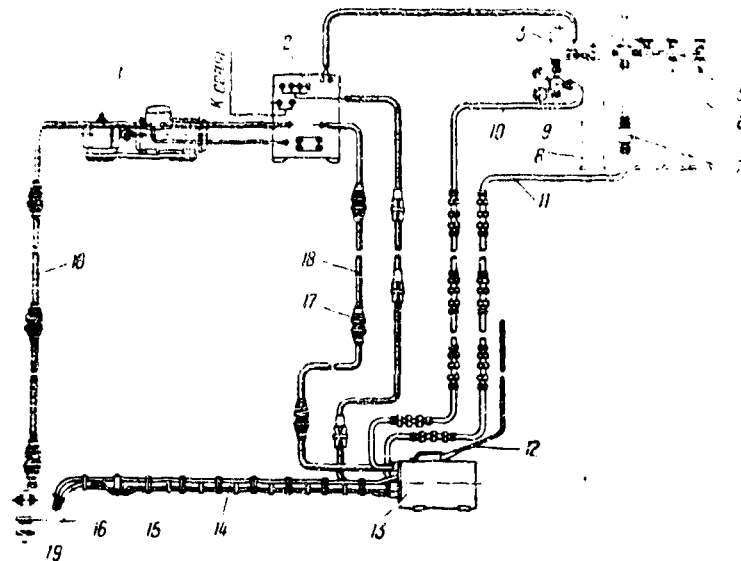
Assembly Diagram of Semiautomatic Machine for Underwater Welding and Cutting: 1 - source of power supply; 2 - cabinet for controlling the machine; 3 - electrode heater; 4 - oxygen reducing valve; 5 - collector; 6 - tanks containing oxygen; 7 - oxygen valve; 8 - tank containing carbon dioxide; 9 - carbon dioxide reducing valve; 10 - hose for feeding the carbon dioxide; 11 - hose for supplying the oxygen; 12 - cable for suspending the tank containing the delivery mechanism during submergence in water; 13 - wire supply mechanism in sealed tank (frame); 14 - special hose-cable; 15 - oxygen hose; 16 - head (burner) of semiautomatic device; 17 - connecting cable sleeves; 18 - welding cable; and 19 - object (sheating of ship). Key: a) to network.
